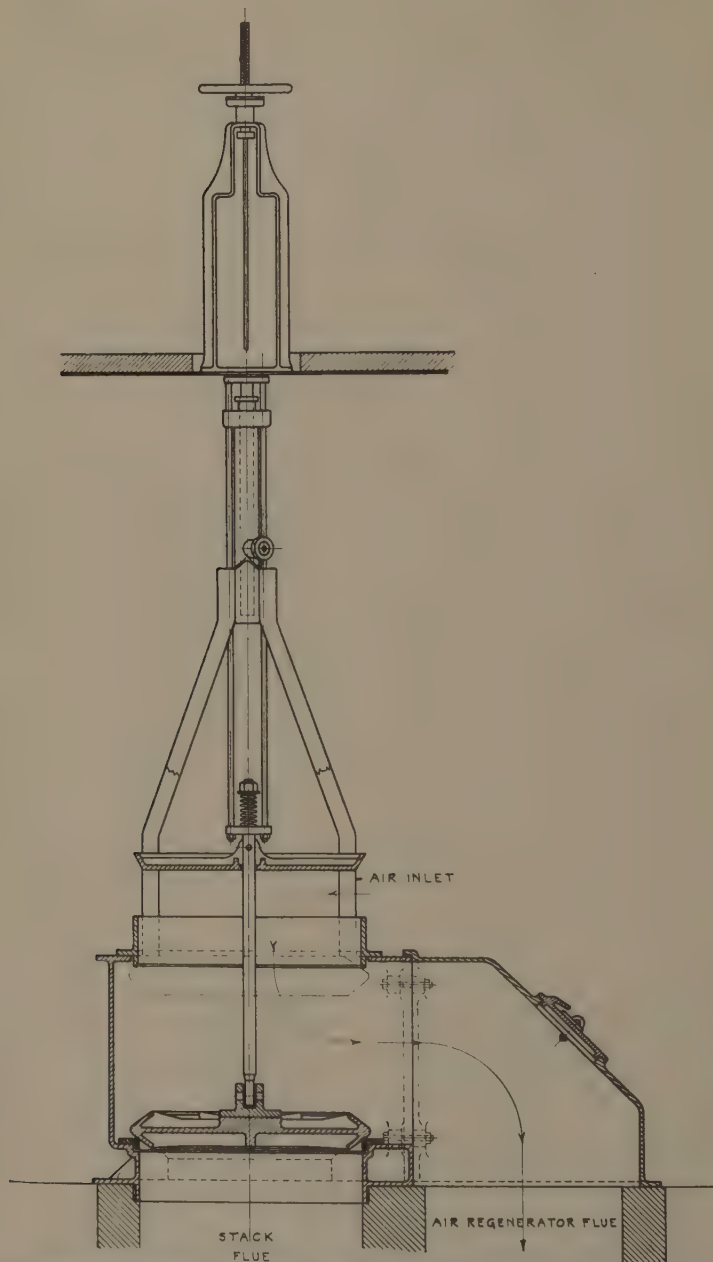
McConnell air reversing valve installed at open-hearth plant No. 2, Homestead Steel Works, Carnegie Steel Company, 1901.
